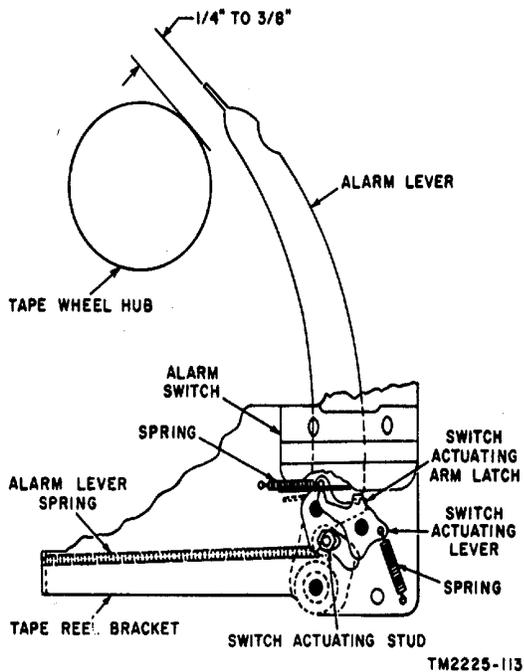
Tape-out alarm adjustment (TT-76/GGC).
